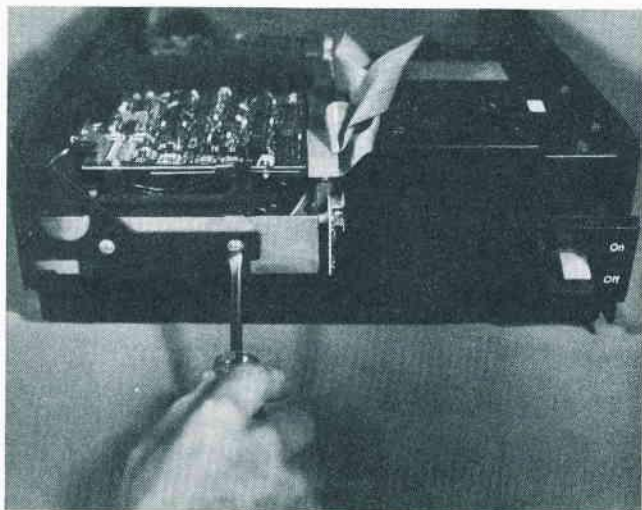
Remove the two silver-colored flat-head screws holding the disk drive to the chassis.
